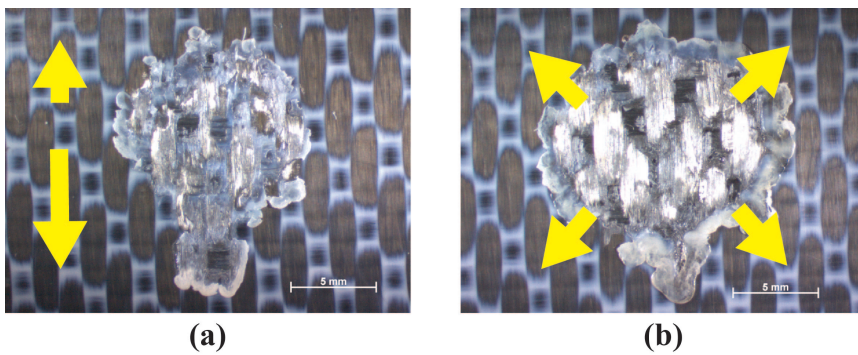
Representative fracture surfaces of SSW joints welded in (a) Jig 1 and (b) Jig 2. The arrows indicate the non-uniform flow of the molten ED in Jig 1 and uniform flow of molten ED in Jig 2.
